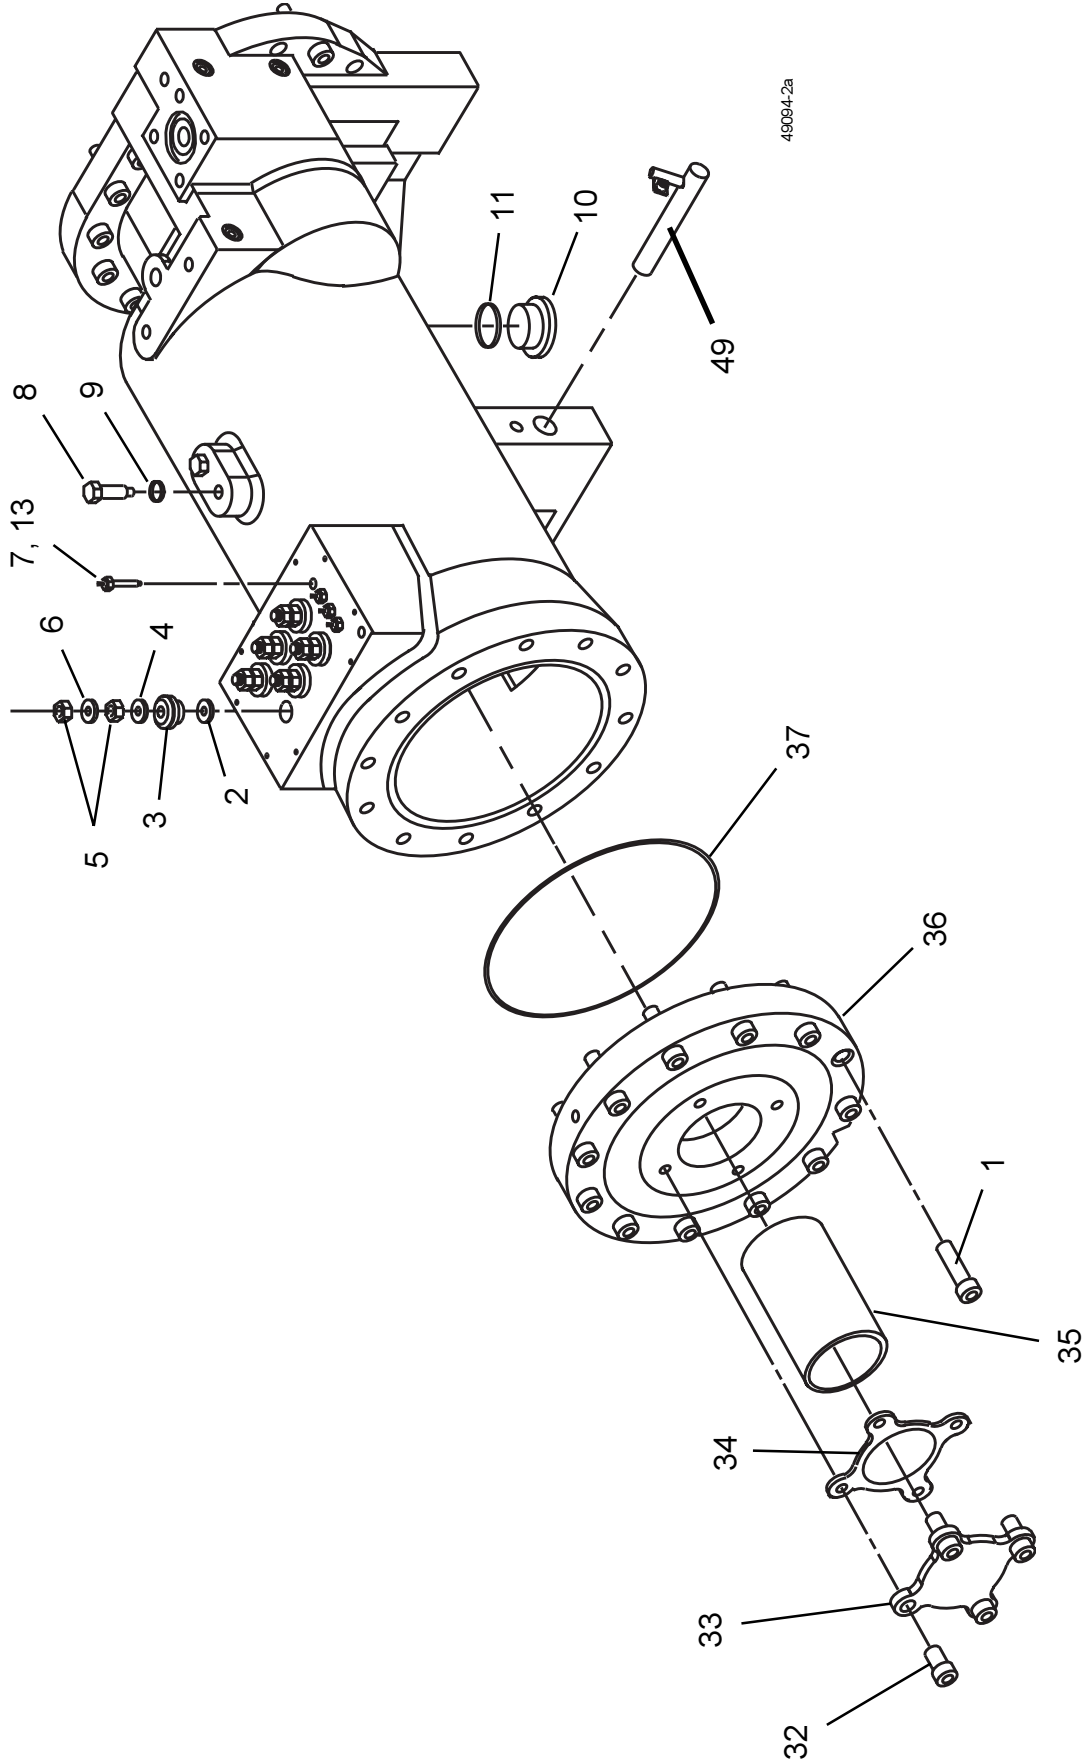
COMPRESSOR COMPONENTS - 124MM, 136MM & 145MM COMPRESSOR (REF. TABLE 5, PAGES 21 AND 22)
